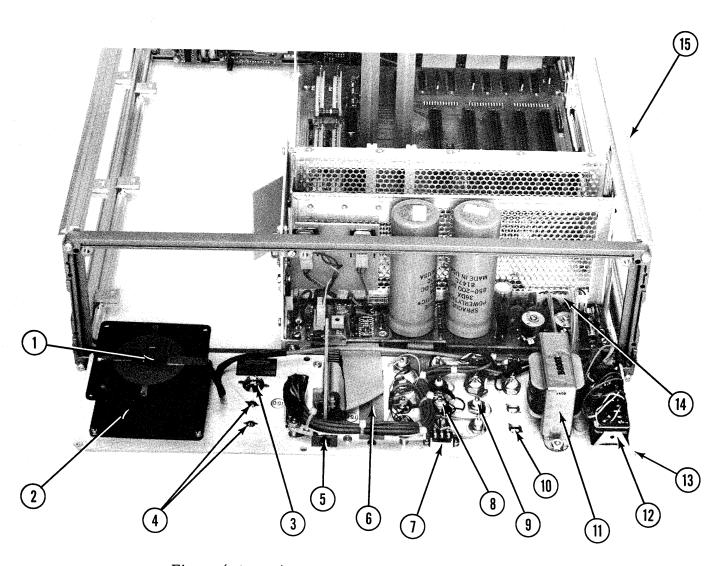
Al6 Rear Panel Assembly (Sheet 2 of 2)
